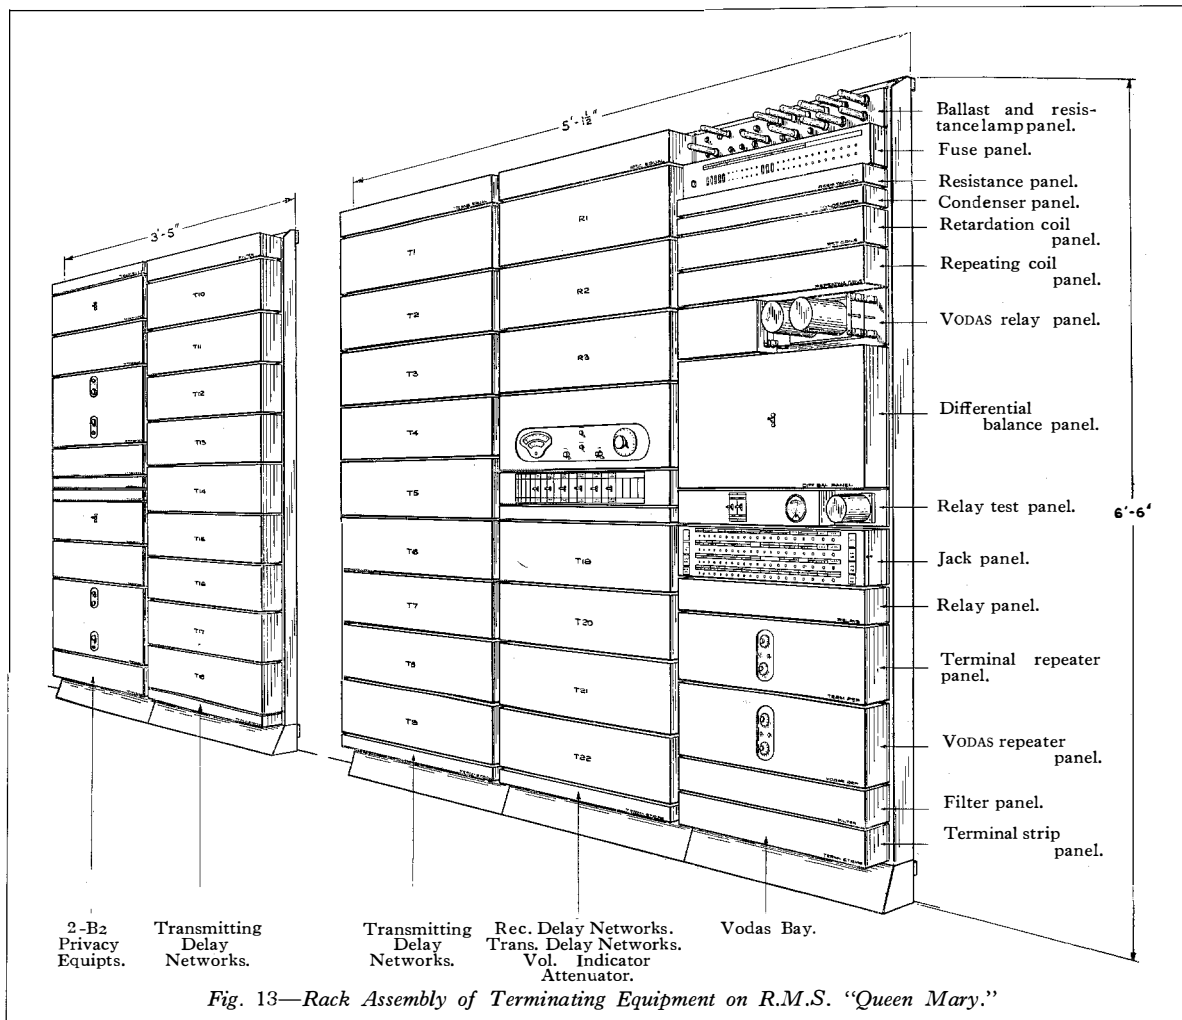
Rack Assembly of Terminating Equipment on R.M.S. "Queen Mary."
